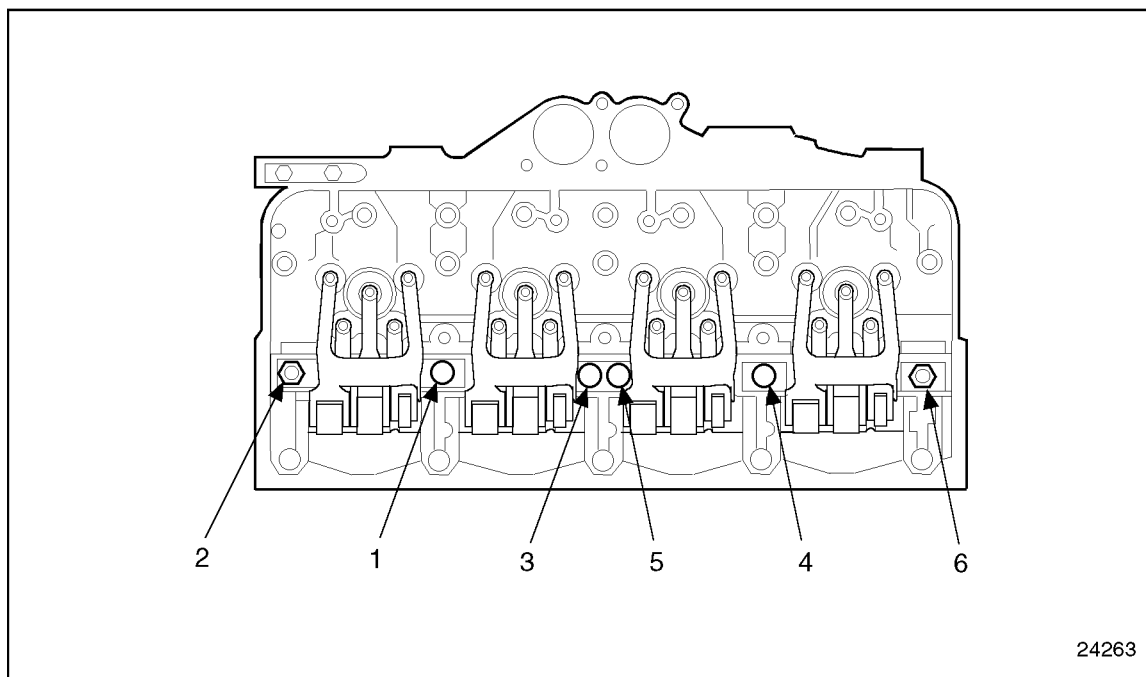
Rocker Arm Shaft Bolt and Nut Torque Sequence
